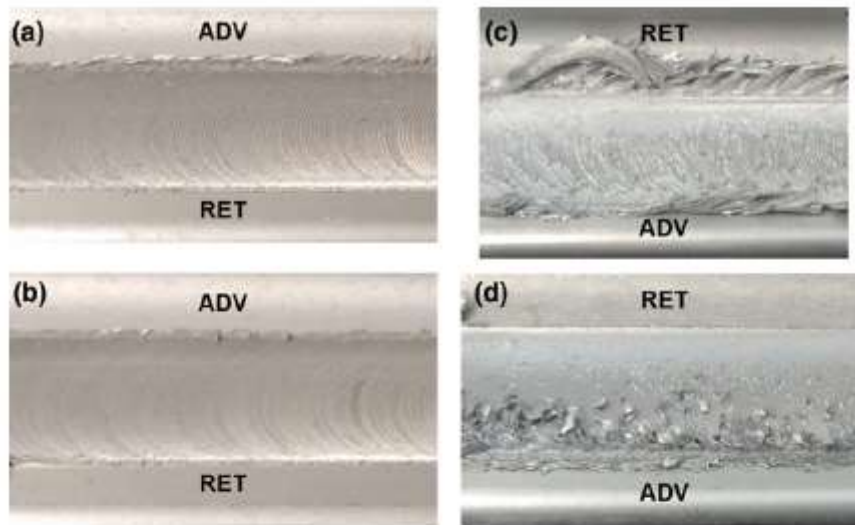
Close-up images showing the surface quality of welds performed by a tool with three flats at 800 rpm and 250 mm/min; b tool with three flats at 1200 rpm and 250 mm/min; c conventional threaded tool at 800 rpm and 250 mm/min; d conventional threaded tool at 1200 rpm and 250 mm/min
